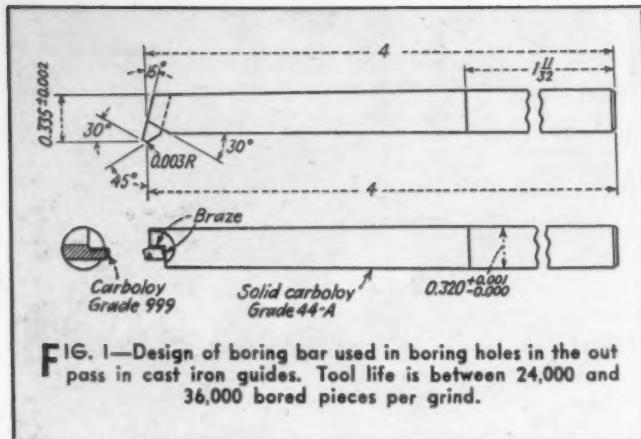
Design of boring bar used in boring holes in the out pass in cast iron guides. Tool life is between 24,000 and 36,000 bored pieces per grind.
